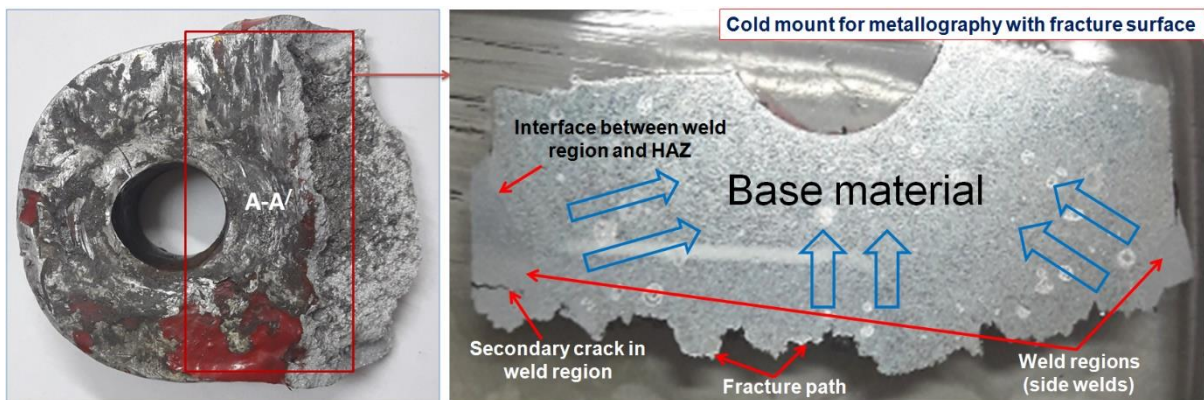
Cold mount containing towing arm fractured end along with location of the sample in main fractured piece
